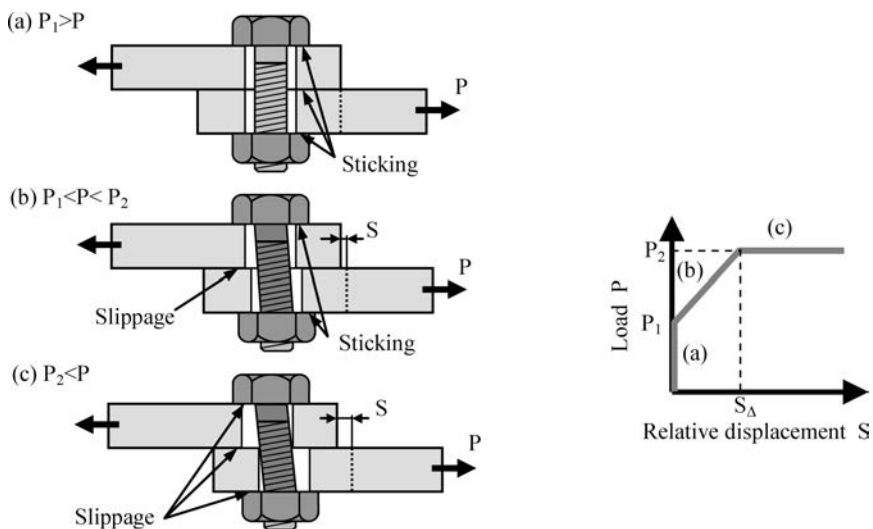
Behavior of the thread joint (bolt-nut fastener) under different load conditions.
